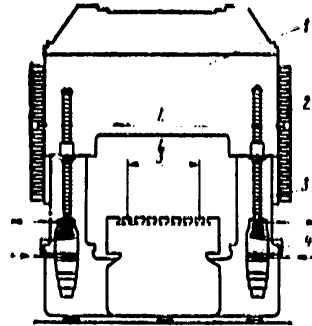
Control system for the moving cross bar of the SIP 800/65 machine tool built by the SIP Company:
